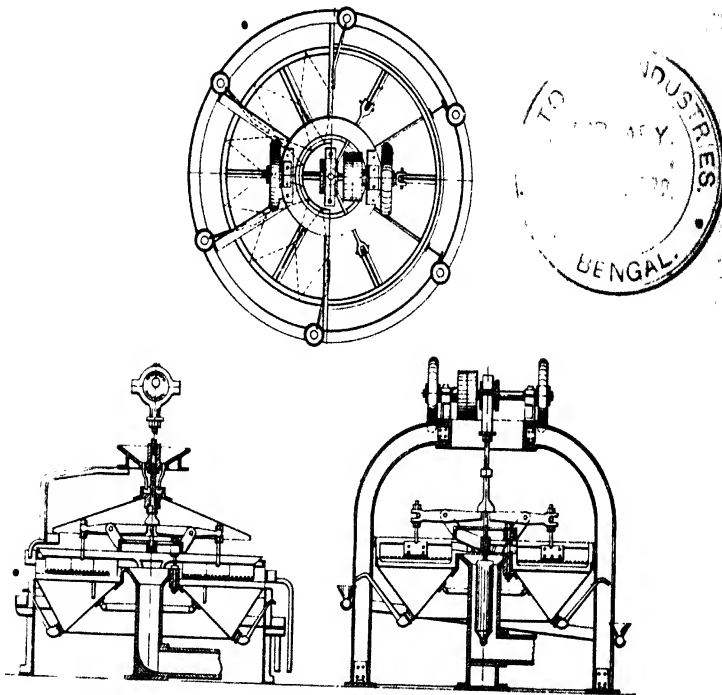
Bilharz circular jig. Plan, elevation and vertical section.
